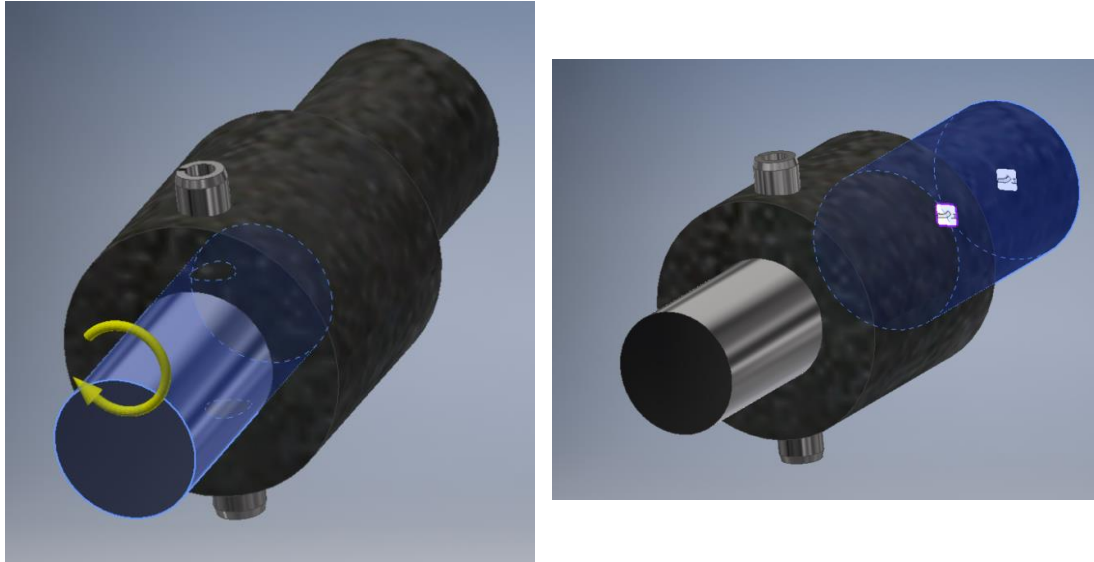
Motor-Gearbox Coupler Load and Fixed Constraint
